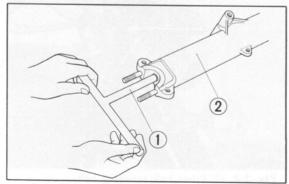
(1) Allen head wrench (2) Bottom case
